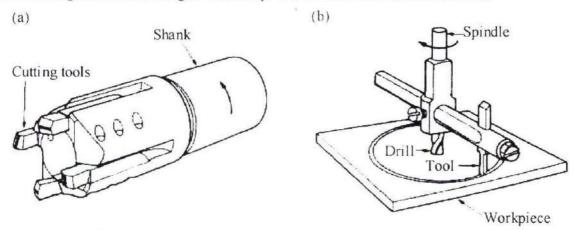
(a) Trepanning tool. (b) Trepanning with a drill-mounted single cutter.
